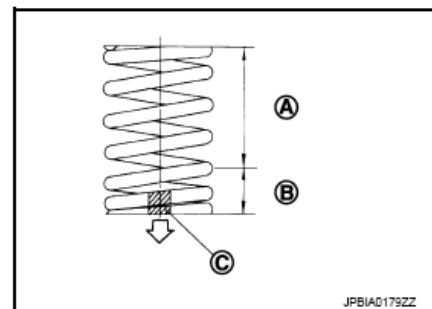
Identifying Valve Spring Wide And Narrow Pitch
